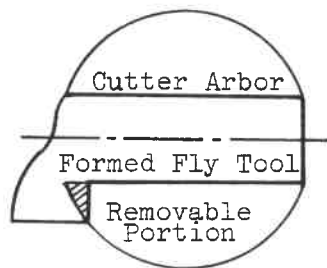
Improvement of the Cutter Arbor Fig. 8 Improvement of the Tool Shape
